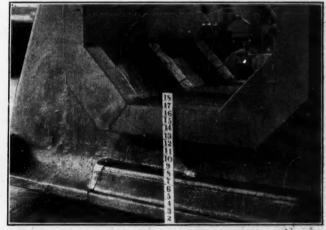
BADLY FRACTURED BEARING PEDESTAL
